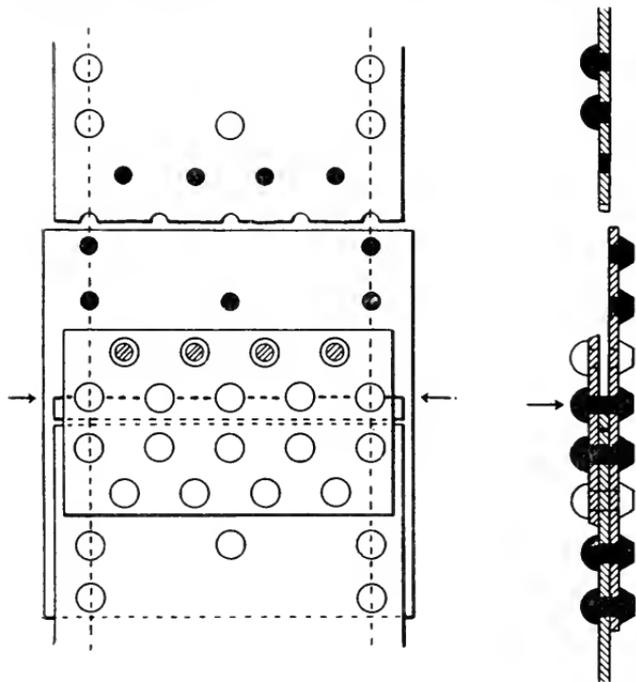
FRACTURE THROUGH THE INSIDE ROW OF RIVETS.
